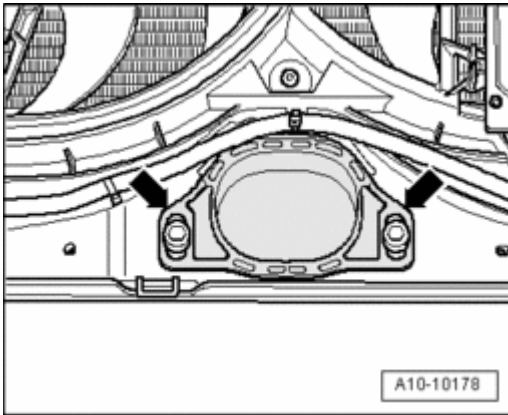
Placing Torque Support On Rubber Buffer For Torque Support And Tightening Bolts
